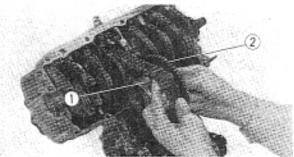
① Primary driven sprocket ② Starter driven gear
